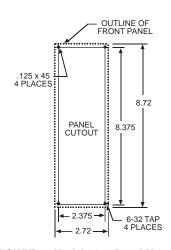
Model 2130 Panel Mounting Cut-Out Dimensions
